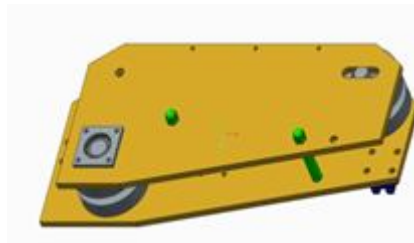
SIDE GRIP CONVEYOR LEFT PLATES ASSEMBLY
